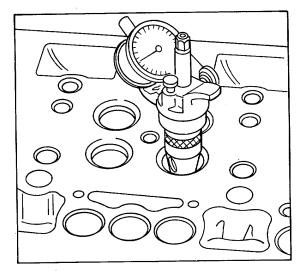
Checking Relative Concentricity at Valve Seat Insert with Relation to Valve Guide
